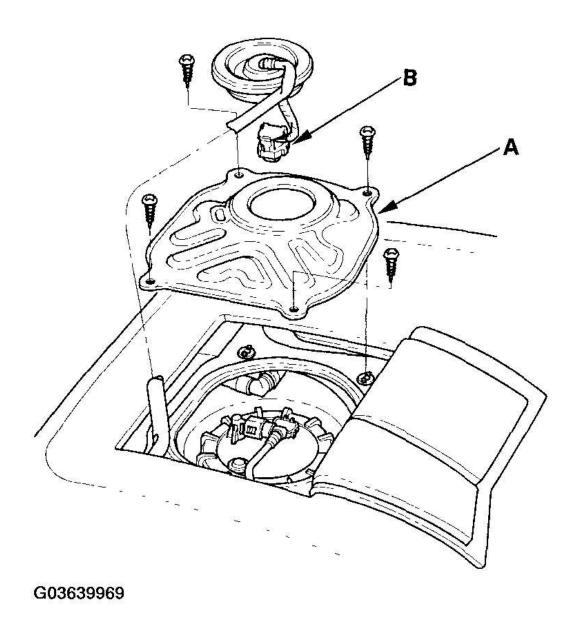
Removing Access Panel From Floor Courtesy of AMERICAN HONDA MOTOR CO., INC.
